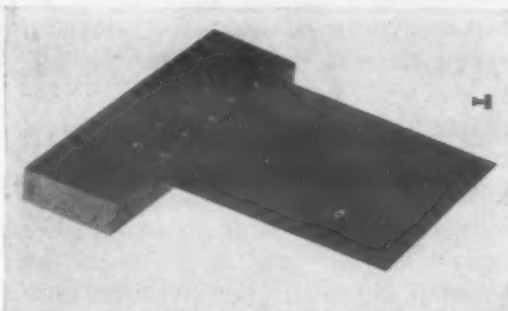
The stagger weld for welding thin metal sheets to heavy bar stock consists of staggered dots or straight line welds on two or more parallel lines.
